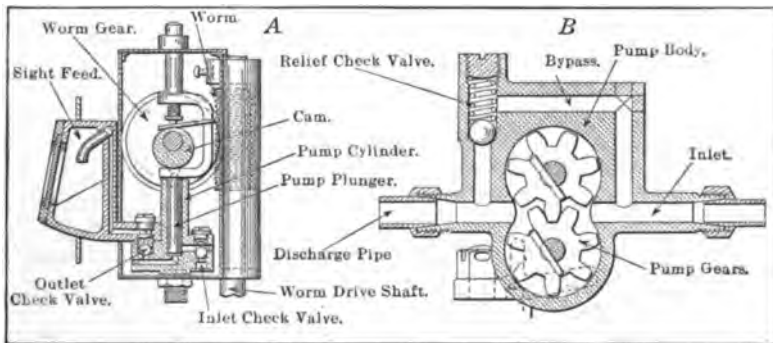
Positive mechanical methods of supplying lubricant. A. Worm gear driven plunger pump oiler. B. Gear pump with high-pressure relief valve.
